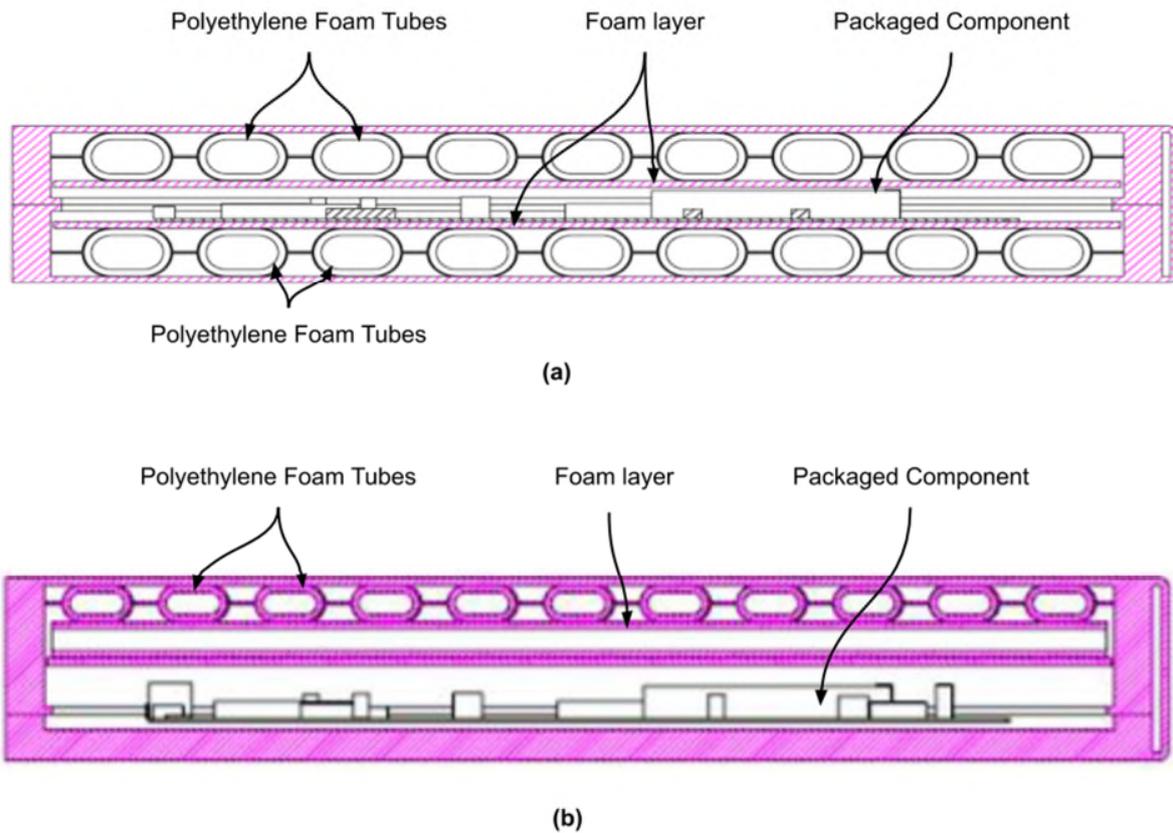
Cross-sectional views of polyethylene tube foam based packaging cushion
